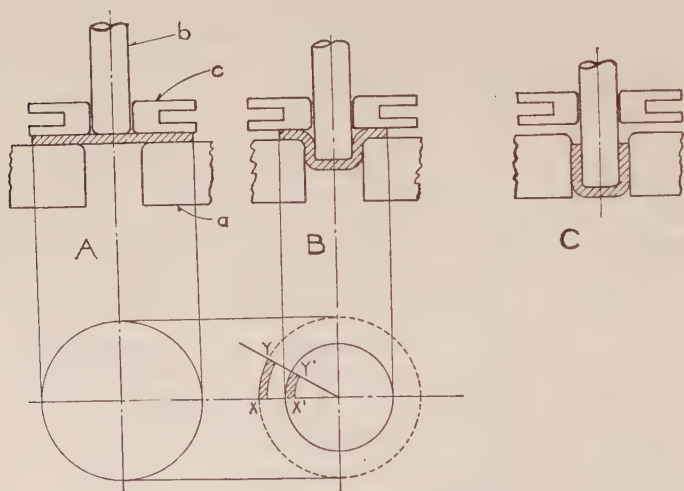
COLD FORMING AN ALUMINUM SHELL.
